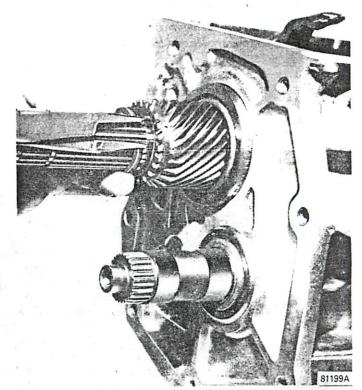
B-45 Fifth Speed Driven Gear Snap Ring Removal/Installation
